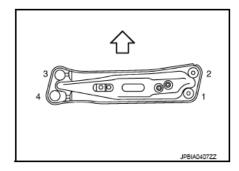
Rear Engine Mounting Member Bolts Tightening Sequence Courtesy of NISSAN MOTOR CO., U.S.A.
